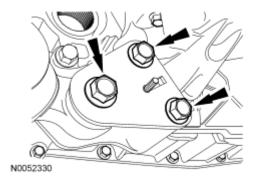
Locating Roll Restrictor-To-Transaxle Bracket Plate Bolts Courtesy of FORD MOTOR CO.
